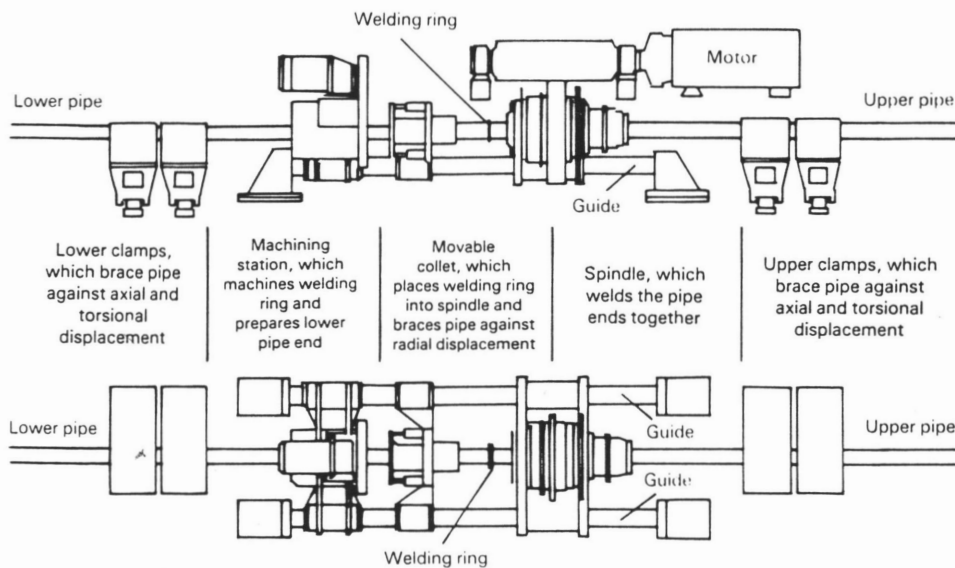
Schematic of the prototype radial friction-welding machine
